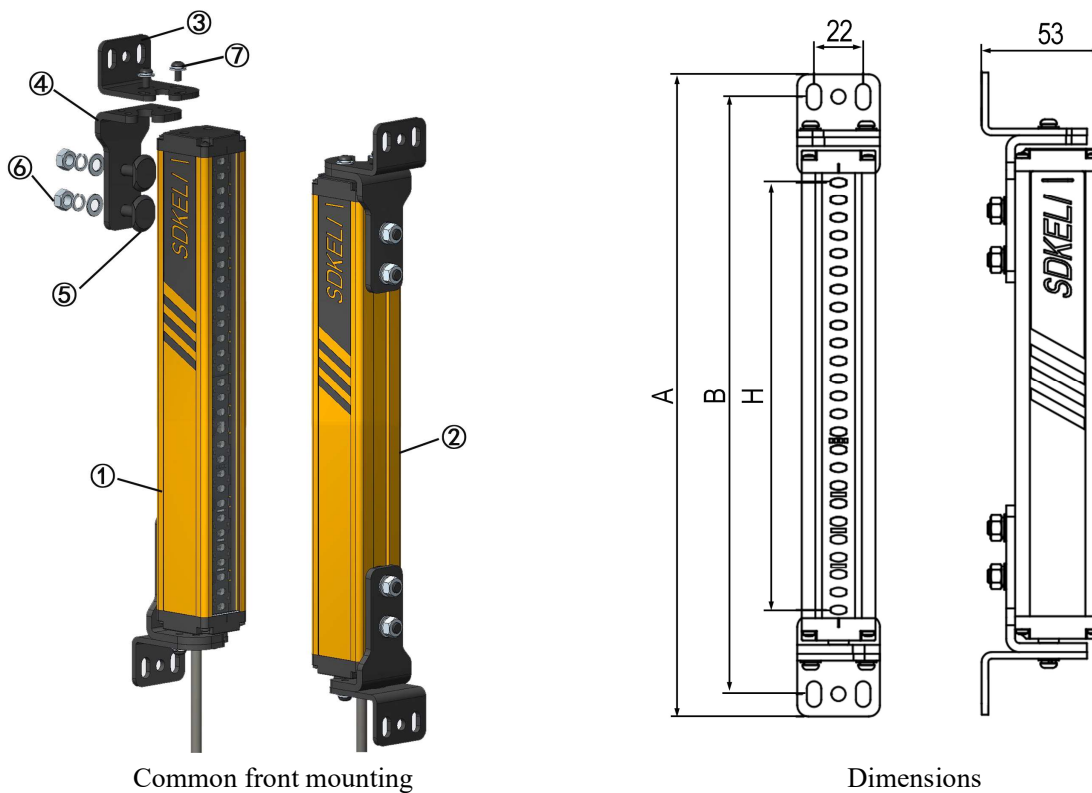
Common Front Mounting Diagram(ZC)
